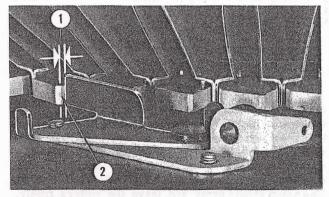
BACK STOP PAWL DEPTH ENGAGEMENT
